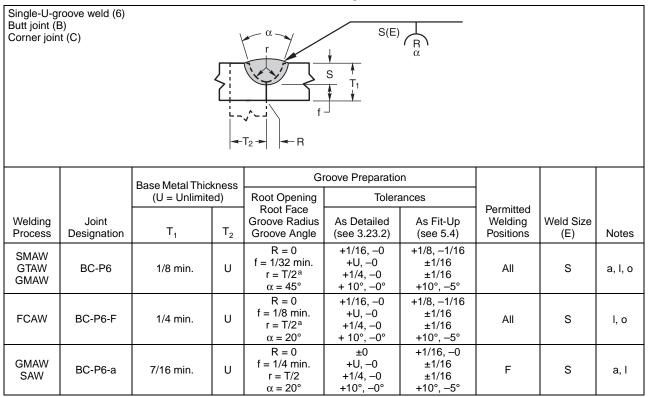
(Continued)—Prequalified PJP Groove Welded Joints—Nontubular (see 3.23.1)
